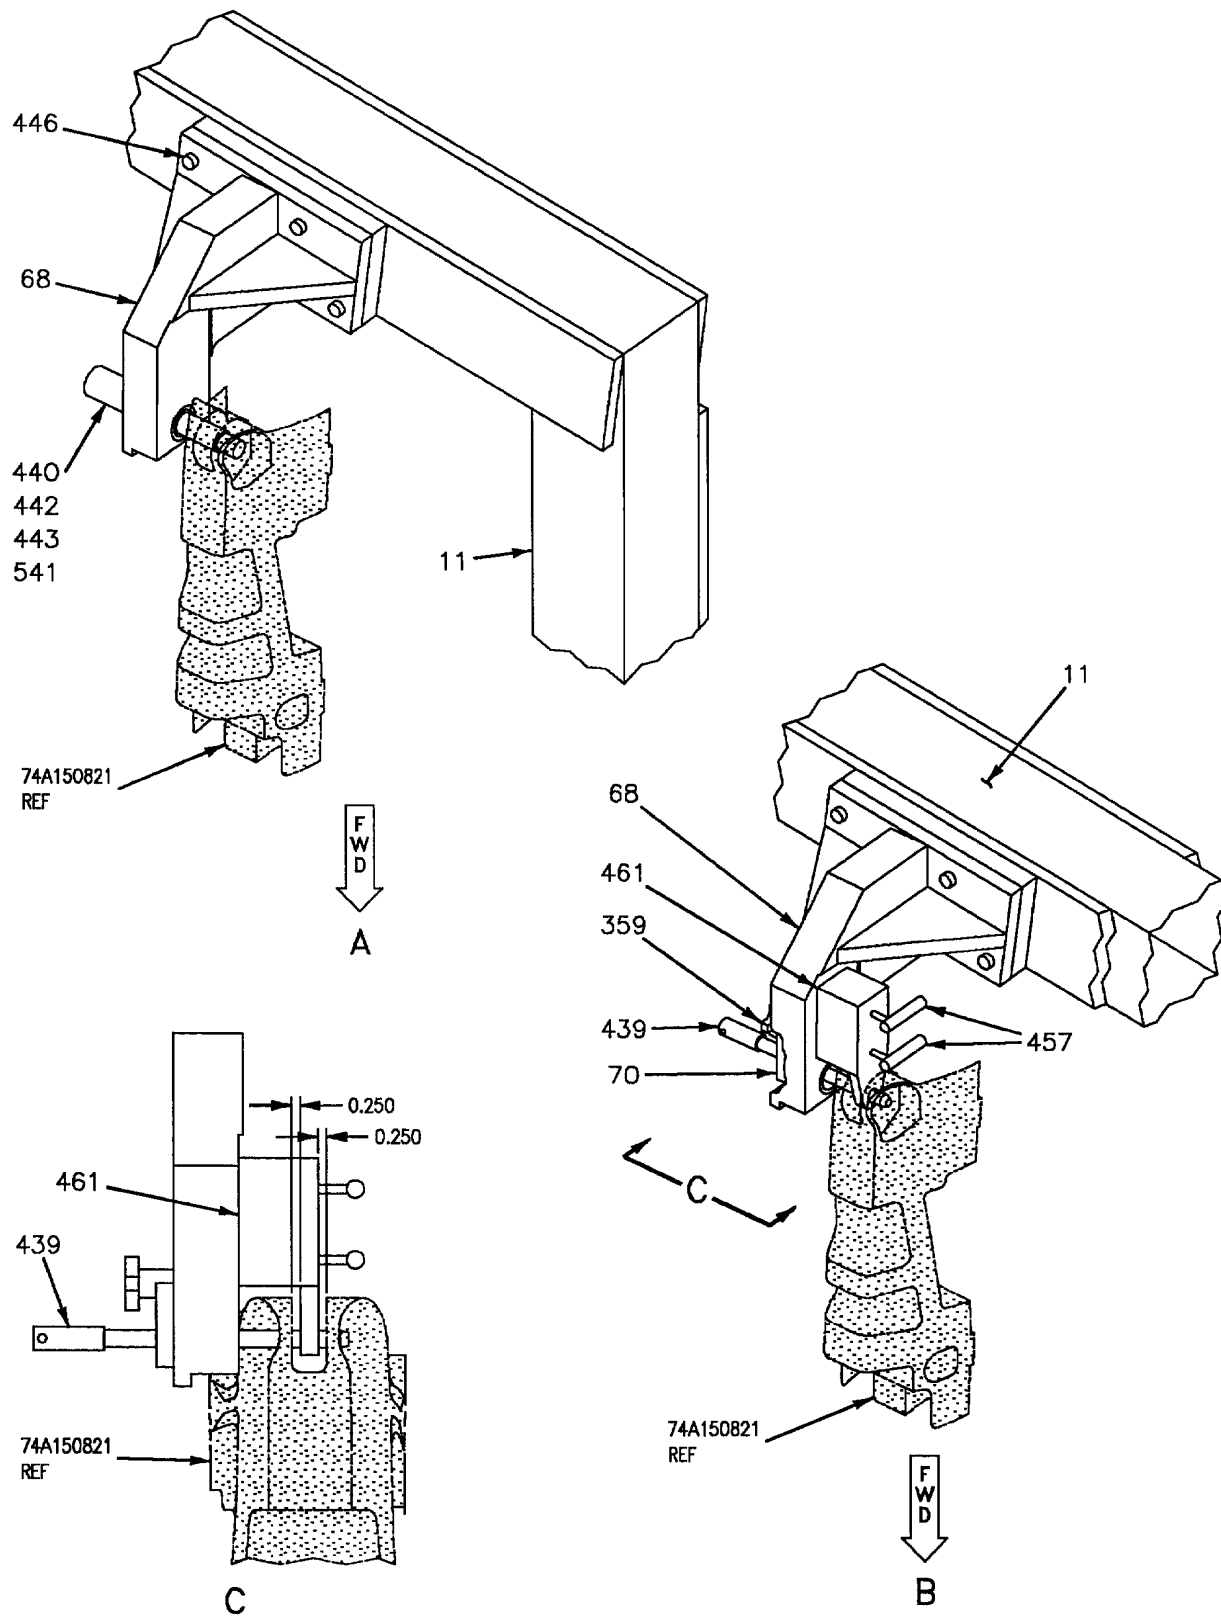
Inboard Aileron Support, 74A150821 (Sheet 1)
